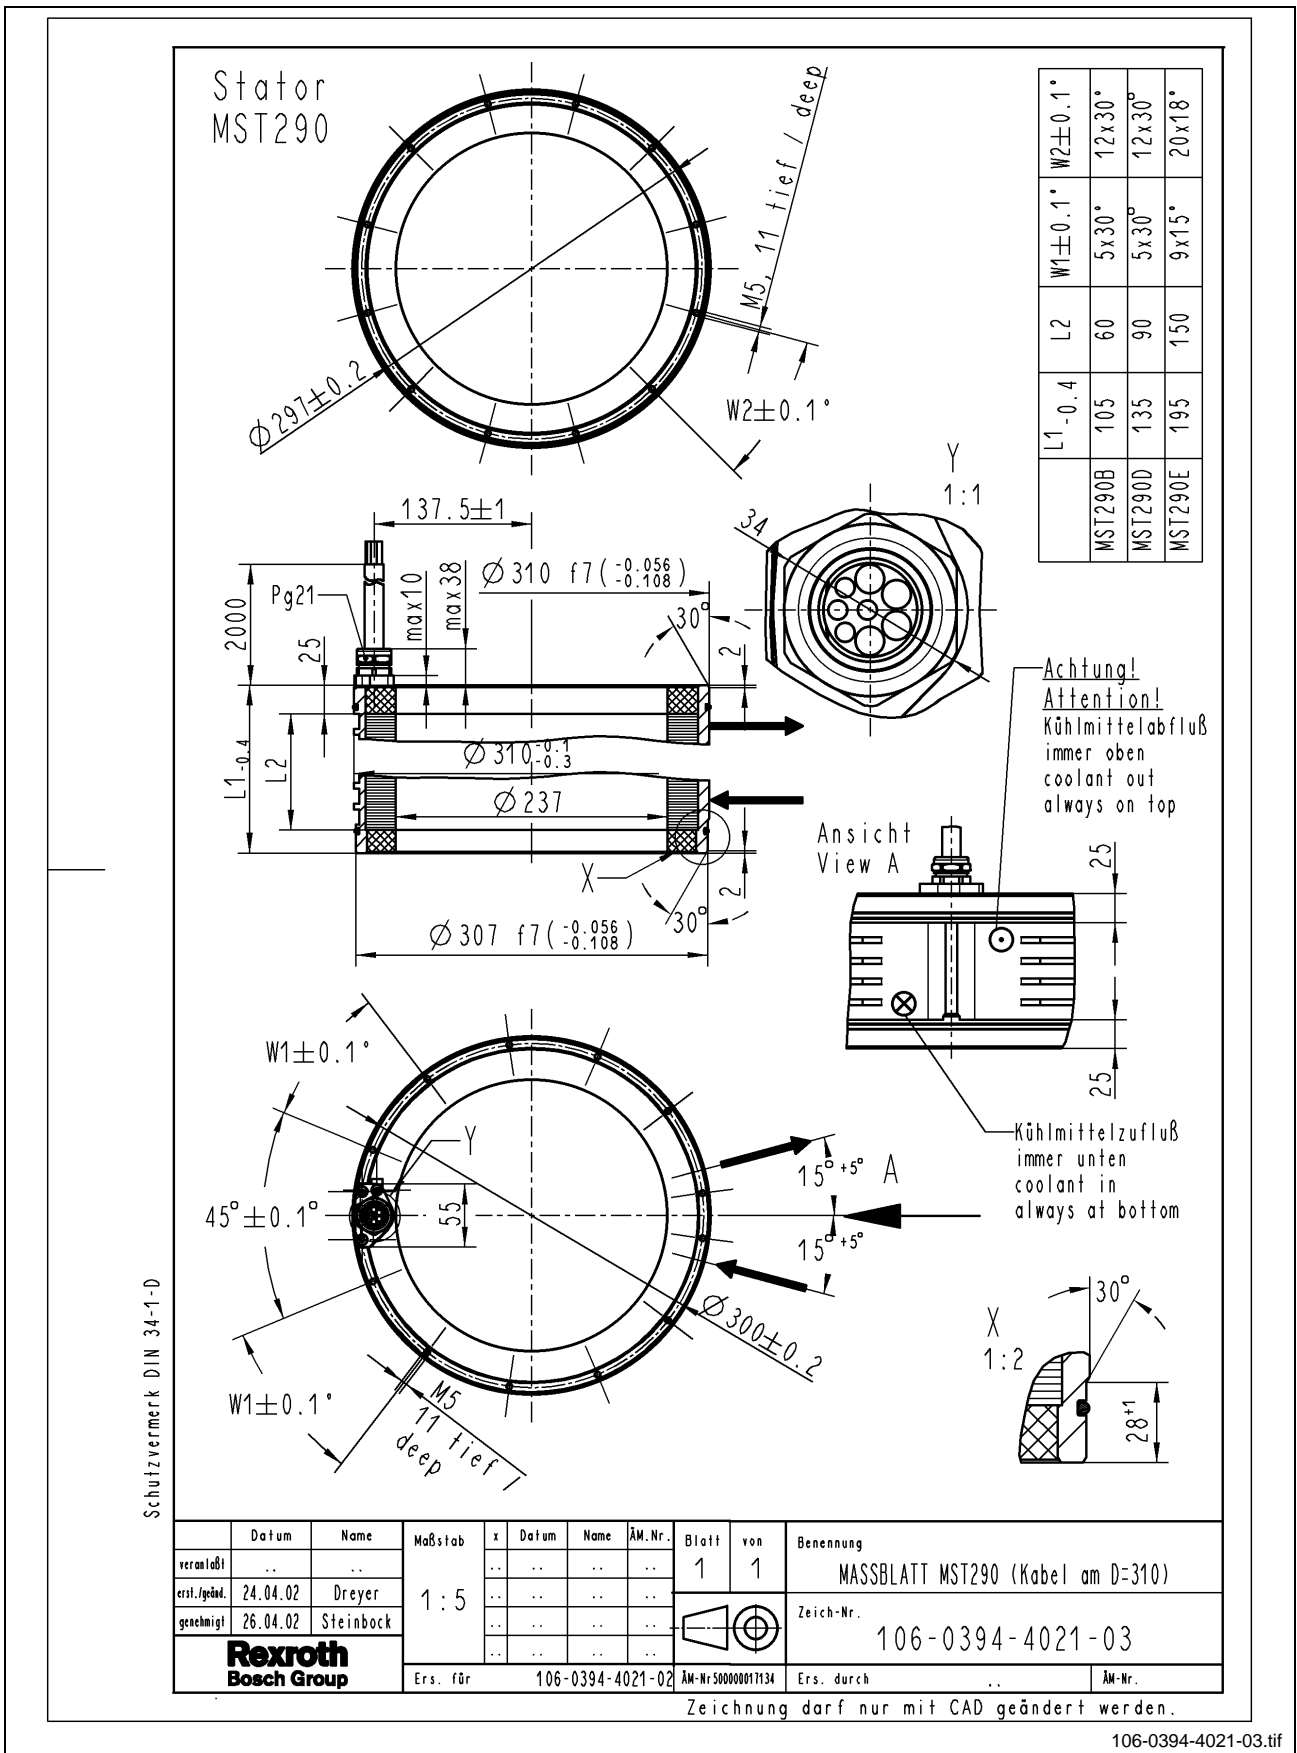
Dimension sheet MST290, electrical connection "CN"
